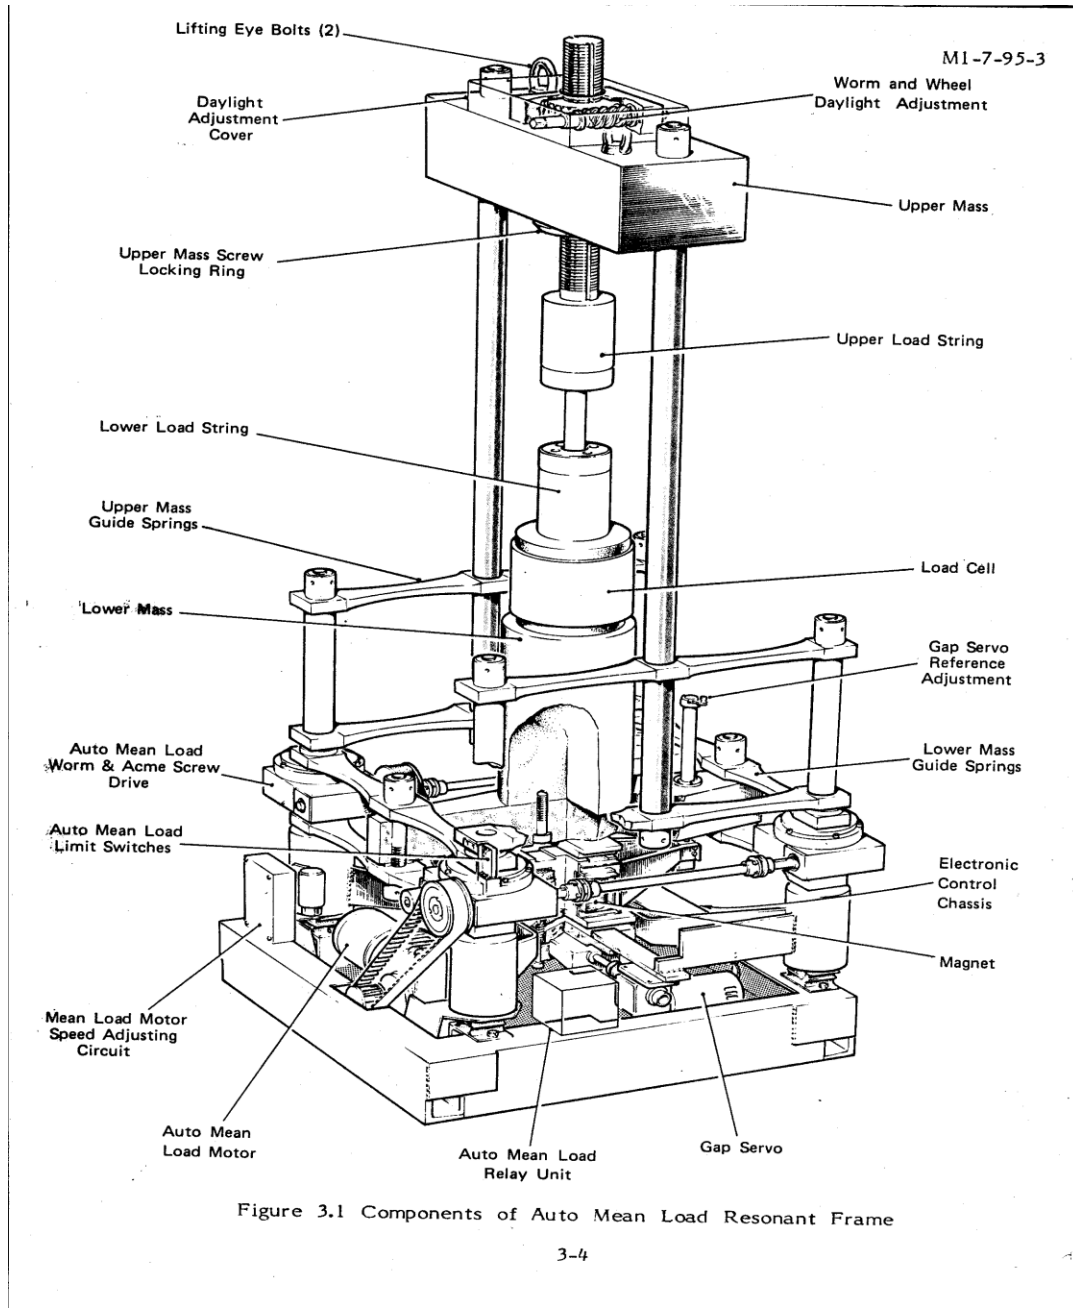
Exploded view of an EMR machine (Reference No. -1)
